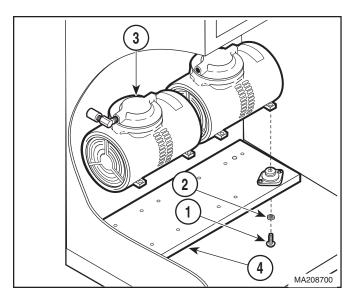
Vacuum Pump Assembly Removal / Installation
